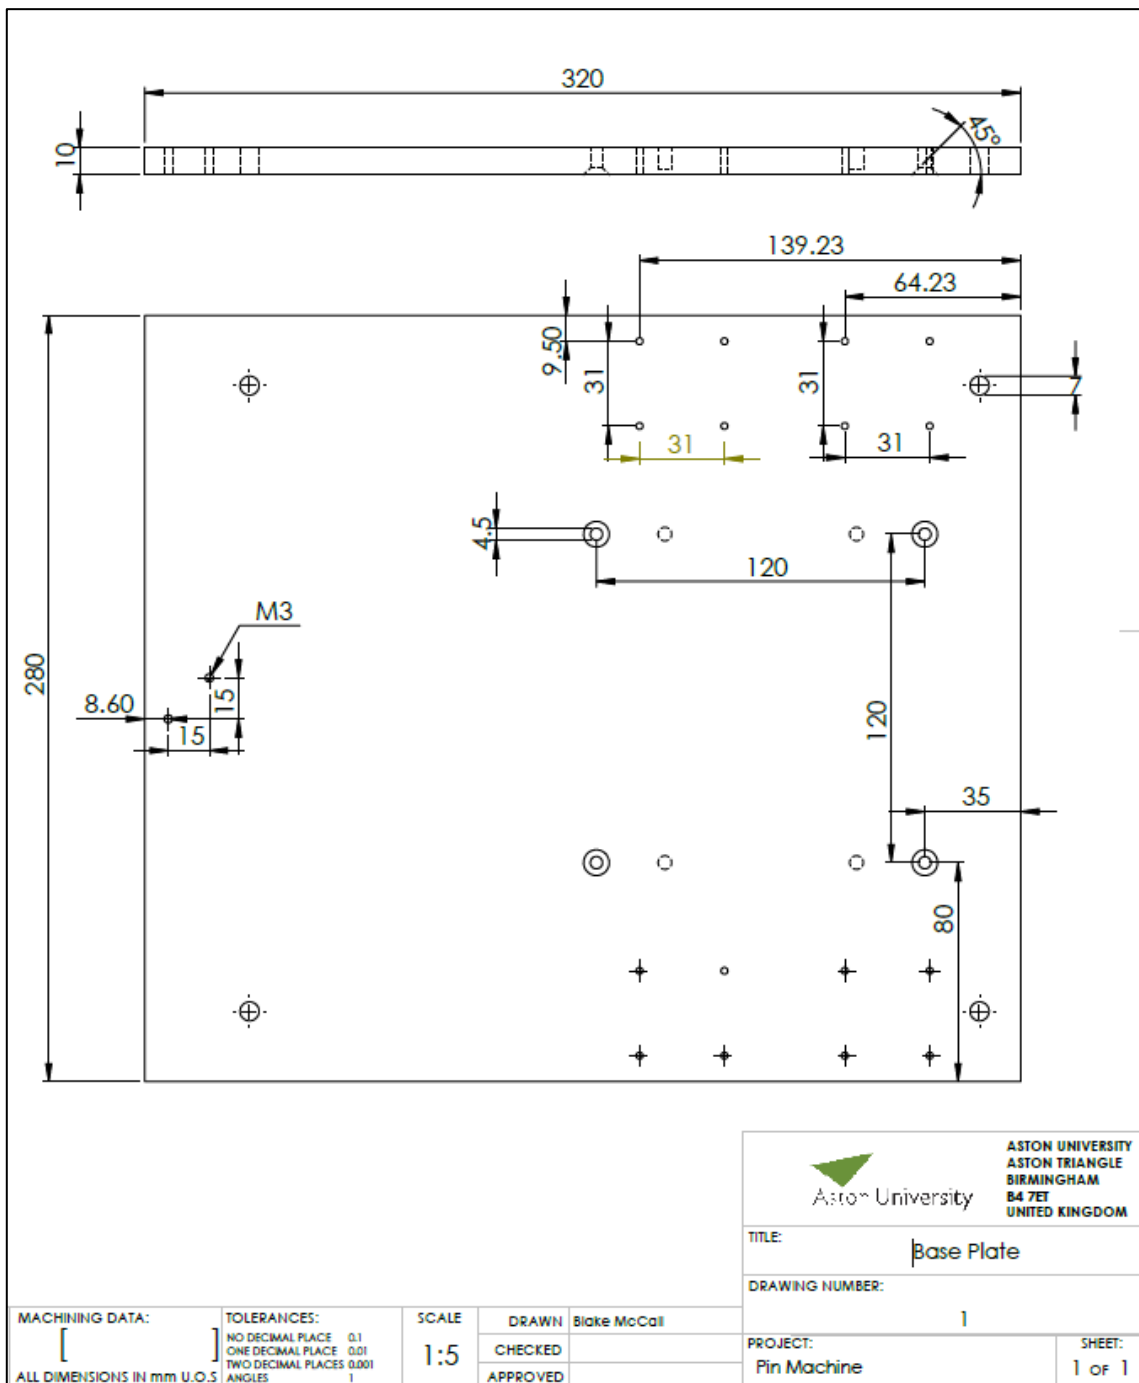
Working drawings of the Base Plate of the Pin Machine
